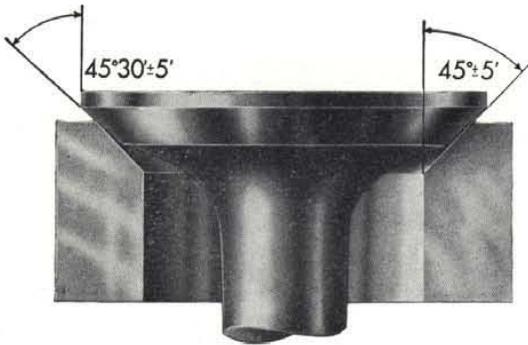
Inclination angles of valve seats in head and valve faces.
